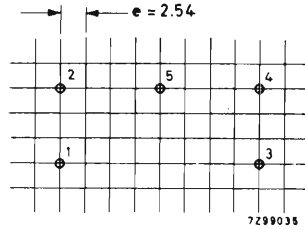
Hole pattern of the printed-wiring board (viewed on circuit side)
